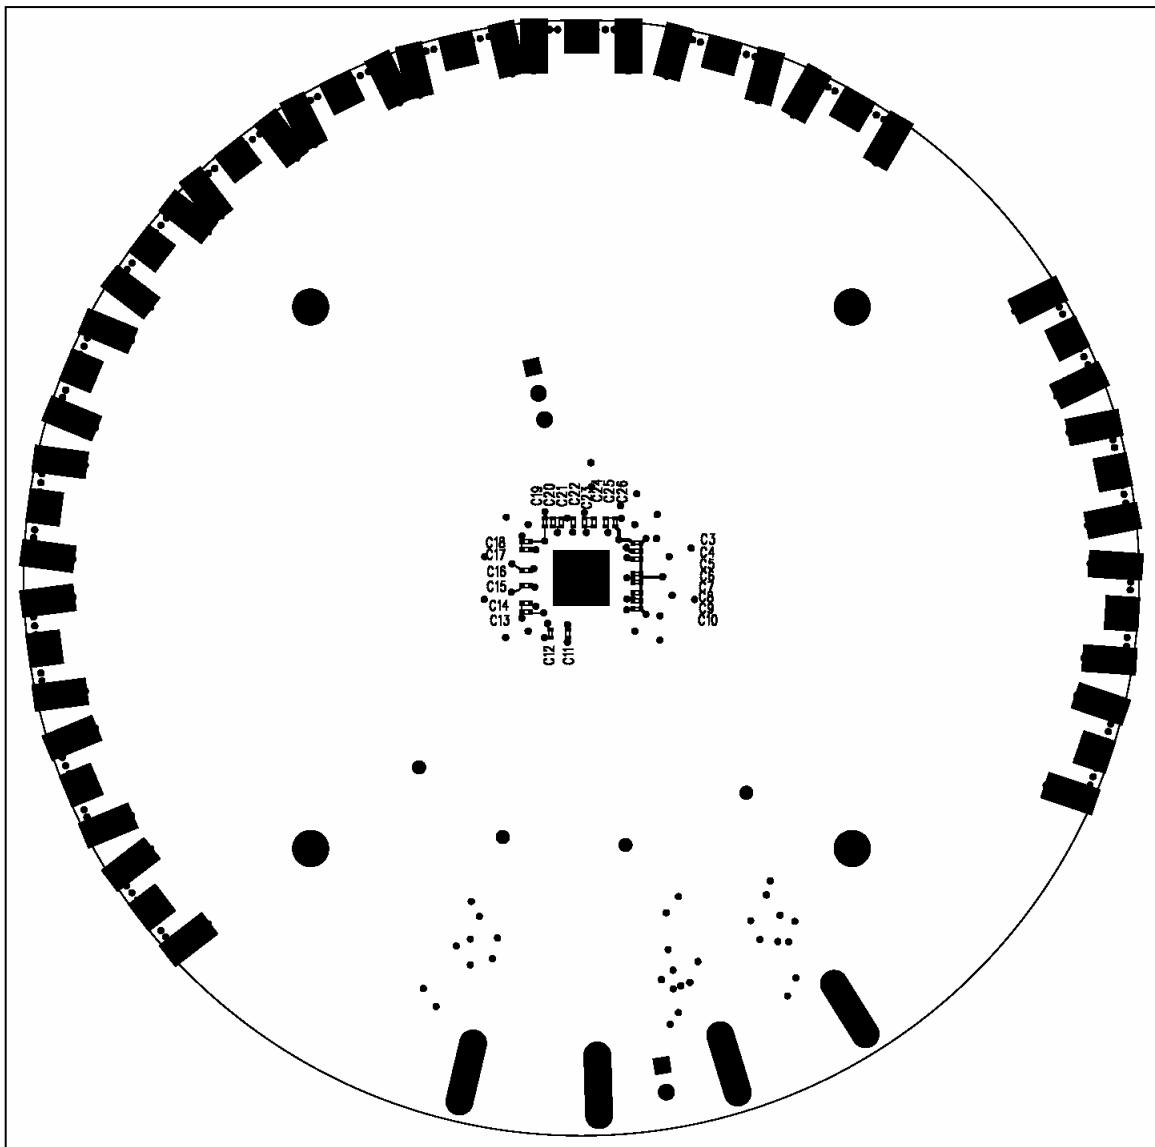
MAX3634 EV Kit Component Placement Guide—Solder Side
